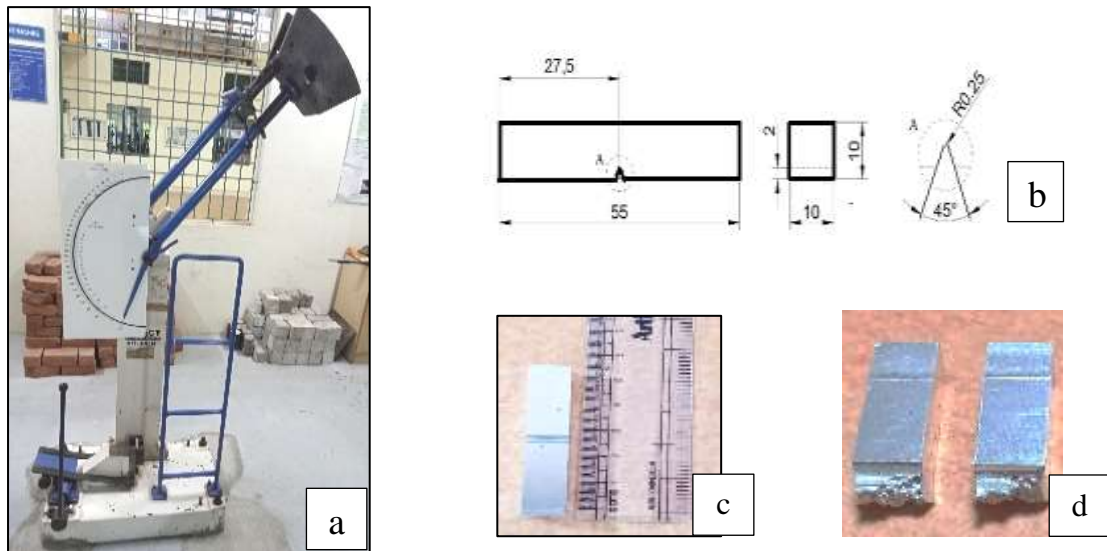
(a) Impact testing machine (b) Specimen size as per ASTM Standard A 370 (c) Before testing (d) After testing
